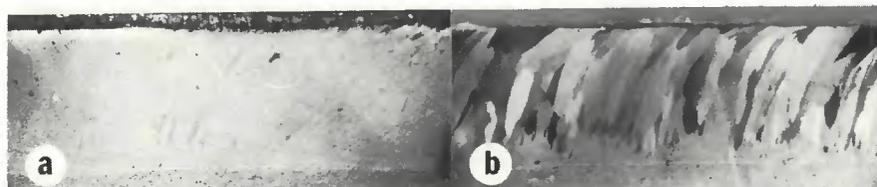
A typical longitudinal centerline-plane section. (a) Continuous growth. (b) Discontinuous growth. 84 ipm welding speed; direction of welding left to right; anodized; polarized light. X25, reduced 30%
